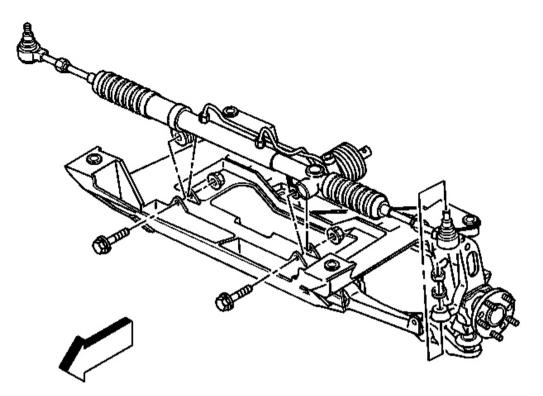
Power Steering Gear & Mounting Bolts Courtesy of GENERAL MOTORS CORP.
